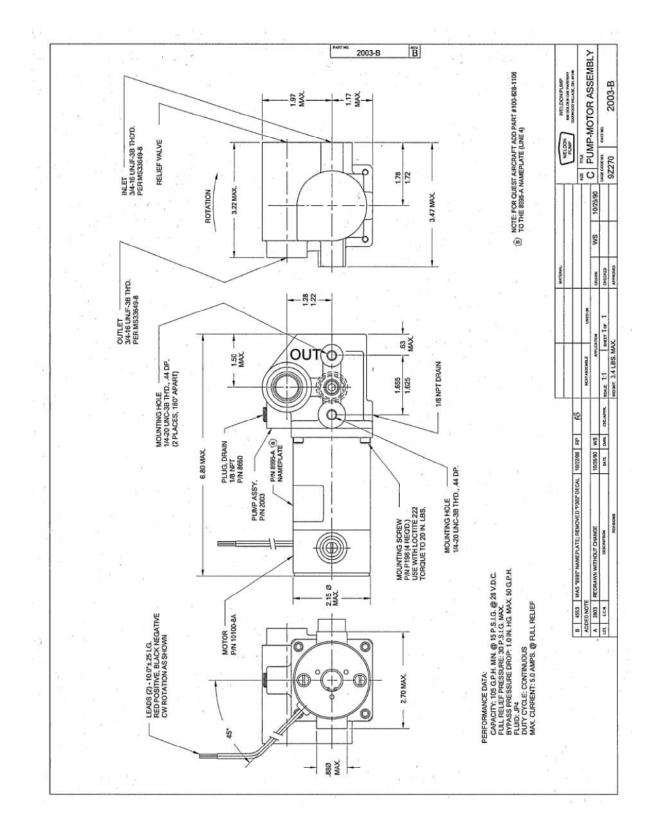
Figure XI –Pump-motor assembly drawing for model 2003-B with performance requirements
